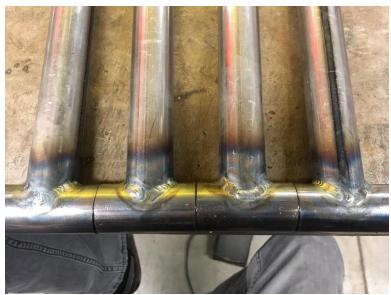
90-degree tubing welded into place for leg hinges
